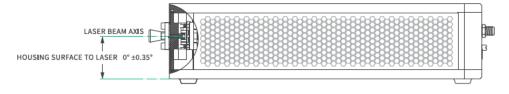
mmRH-5591 Mechanical Dimensions, Top View
